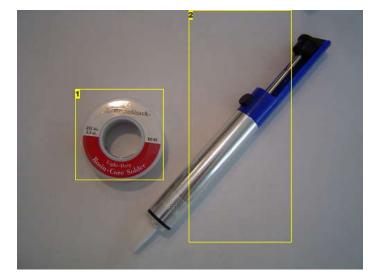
More solder. 2. Solder sucker, for those pesky little errors.
